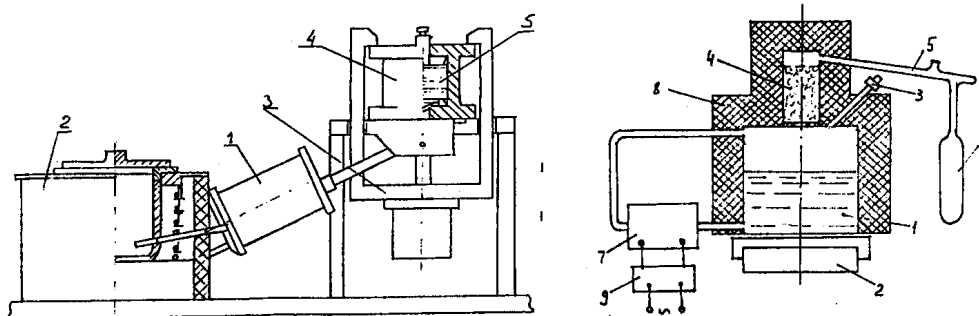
Scheme of experimental stand for motor rotor potting. 1 – MHD pump; 2 – electric furnace; 3 – mechanism for press form locking; 4 – press form; 5 – laminated rotor.
